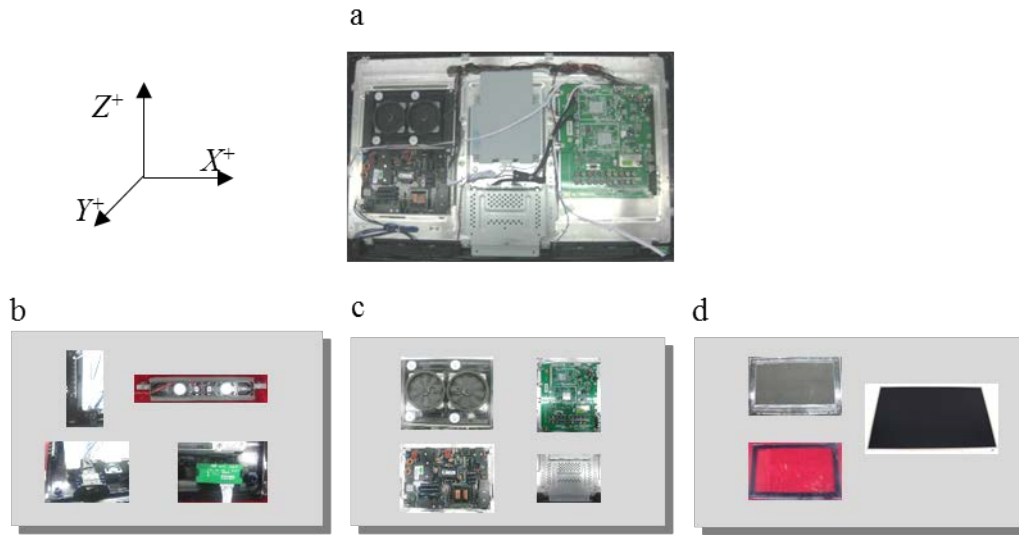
The front assembly part of the LC24F4 LCD-TV: (a) front assembly part, (b) components J, K, L, M, (c) components N, O, P, Q, and (d) components R, S, T
